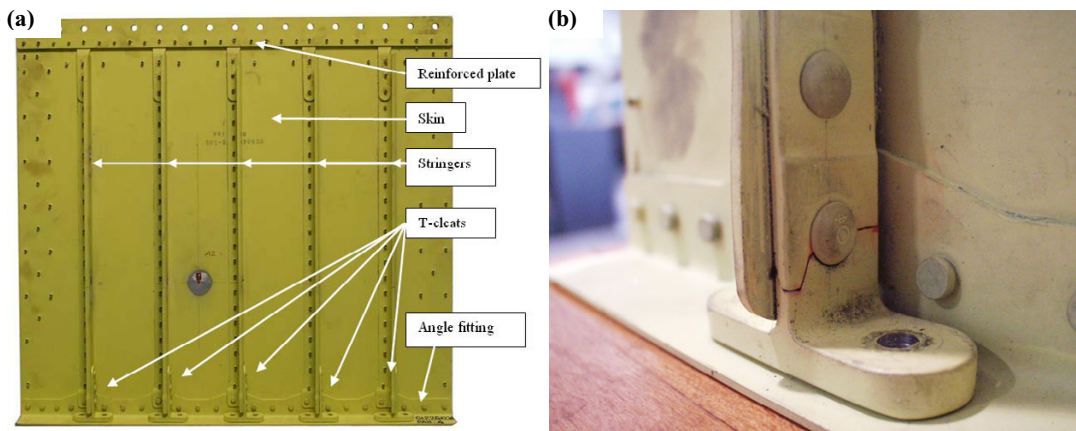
(a) Helicopter's panel under analysis; (b) The lower part of the panel is the real modular joint under test. It is clearly visible a crack in the lower rivet of the T-cleat
